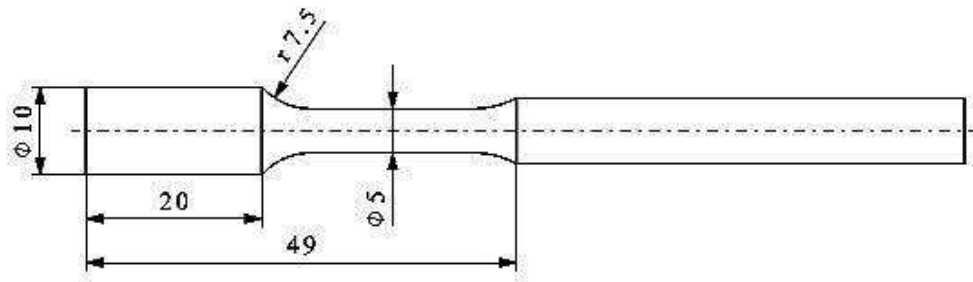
Geometry of the fatigue and fretting fatigue specimen according to ISO 1143:2010(E)
